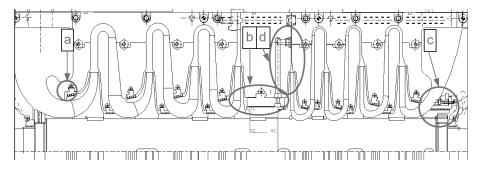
Compressor cross-sectional drawing showing detail of rotor and seals: a) impeller shroud labyrinth seal, b) honeycomb interstage seal, c) abradable seal, and d) honeycomb interstage seal. 12
